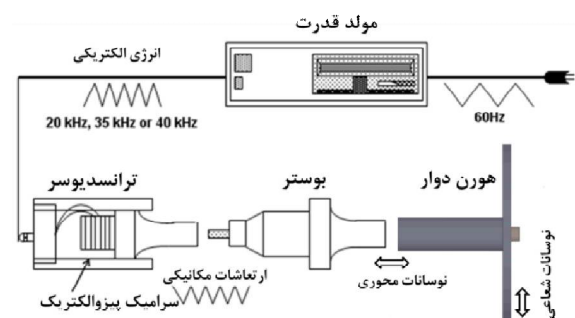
Vibration system used for continuous ultrasonic welding
